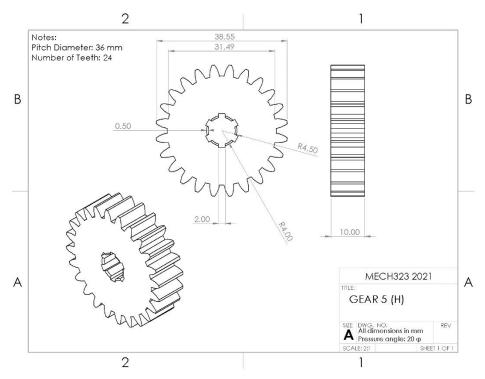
CAD drawing for the final design of Gear 5 (h).
